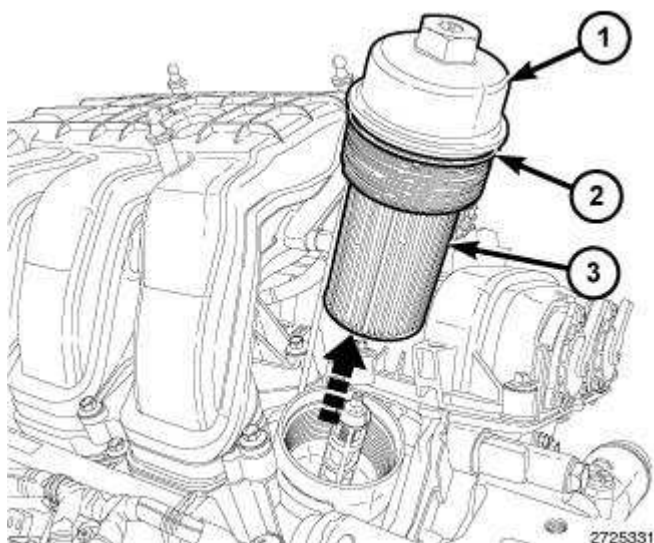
Oil Filter Cap, O-Ring Seal & Oil Filter
